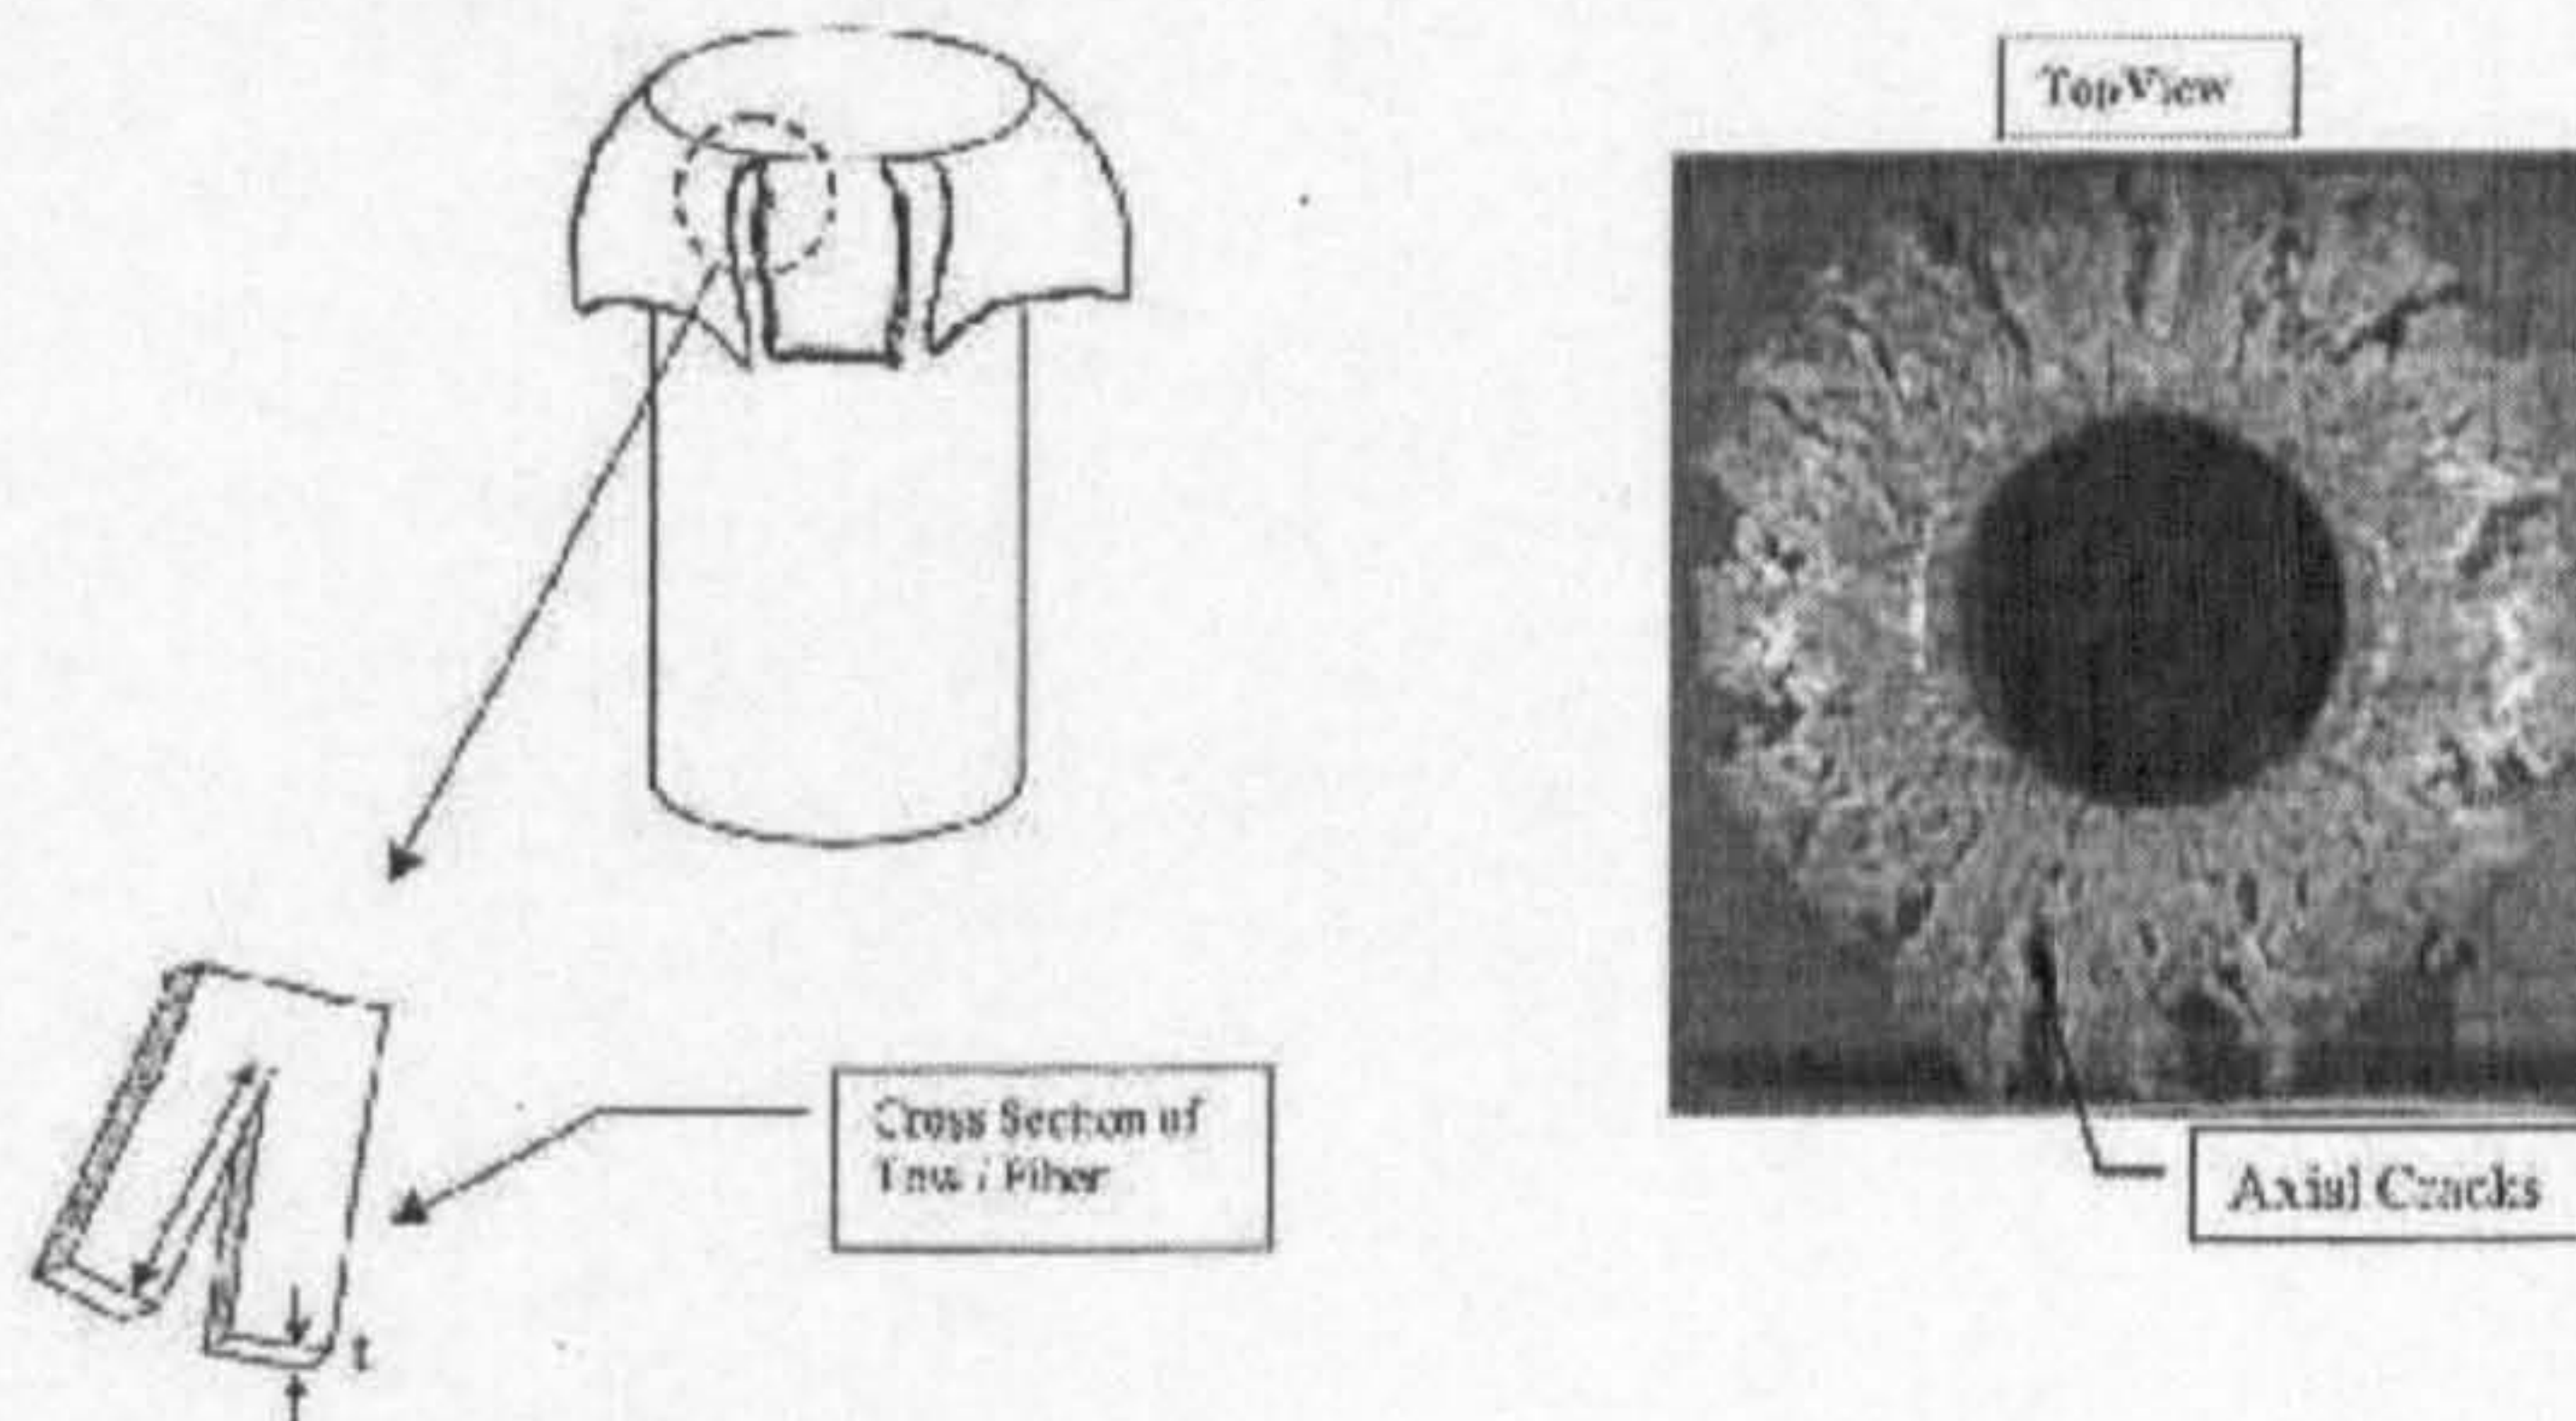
Close up drawing of a crack region and top view of a damaged tube for a braided composite tube [45].
